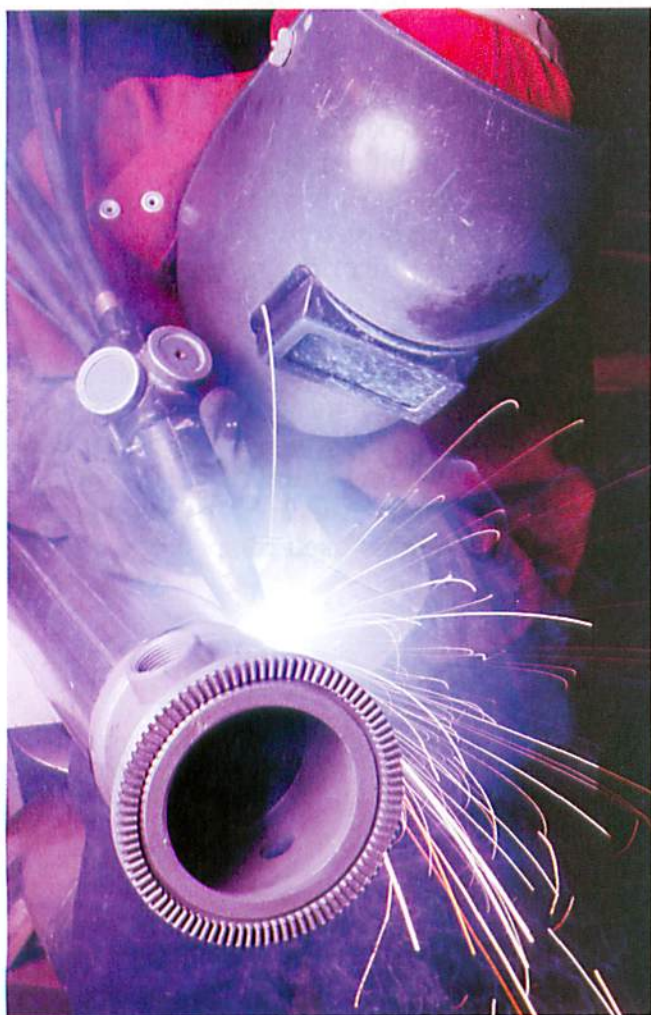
Modern industry depends on welding processes for many jobs. A drawing must clearly specify the engineering designer's intent for each weld if the part is to be properly fabricated.
